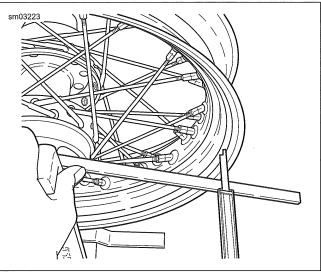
Checking Wheel Hub Offset Dimension (Typical)
